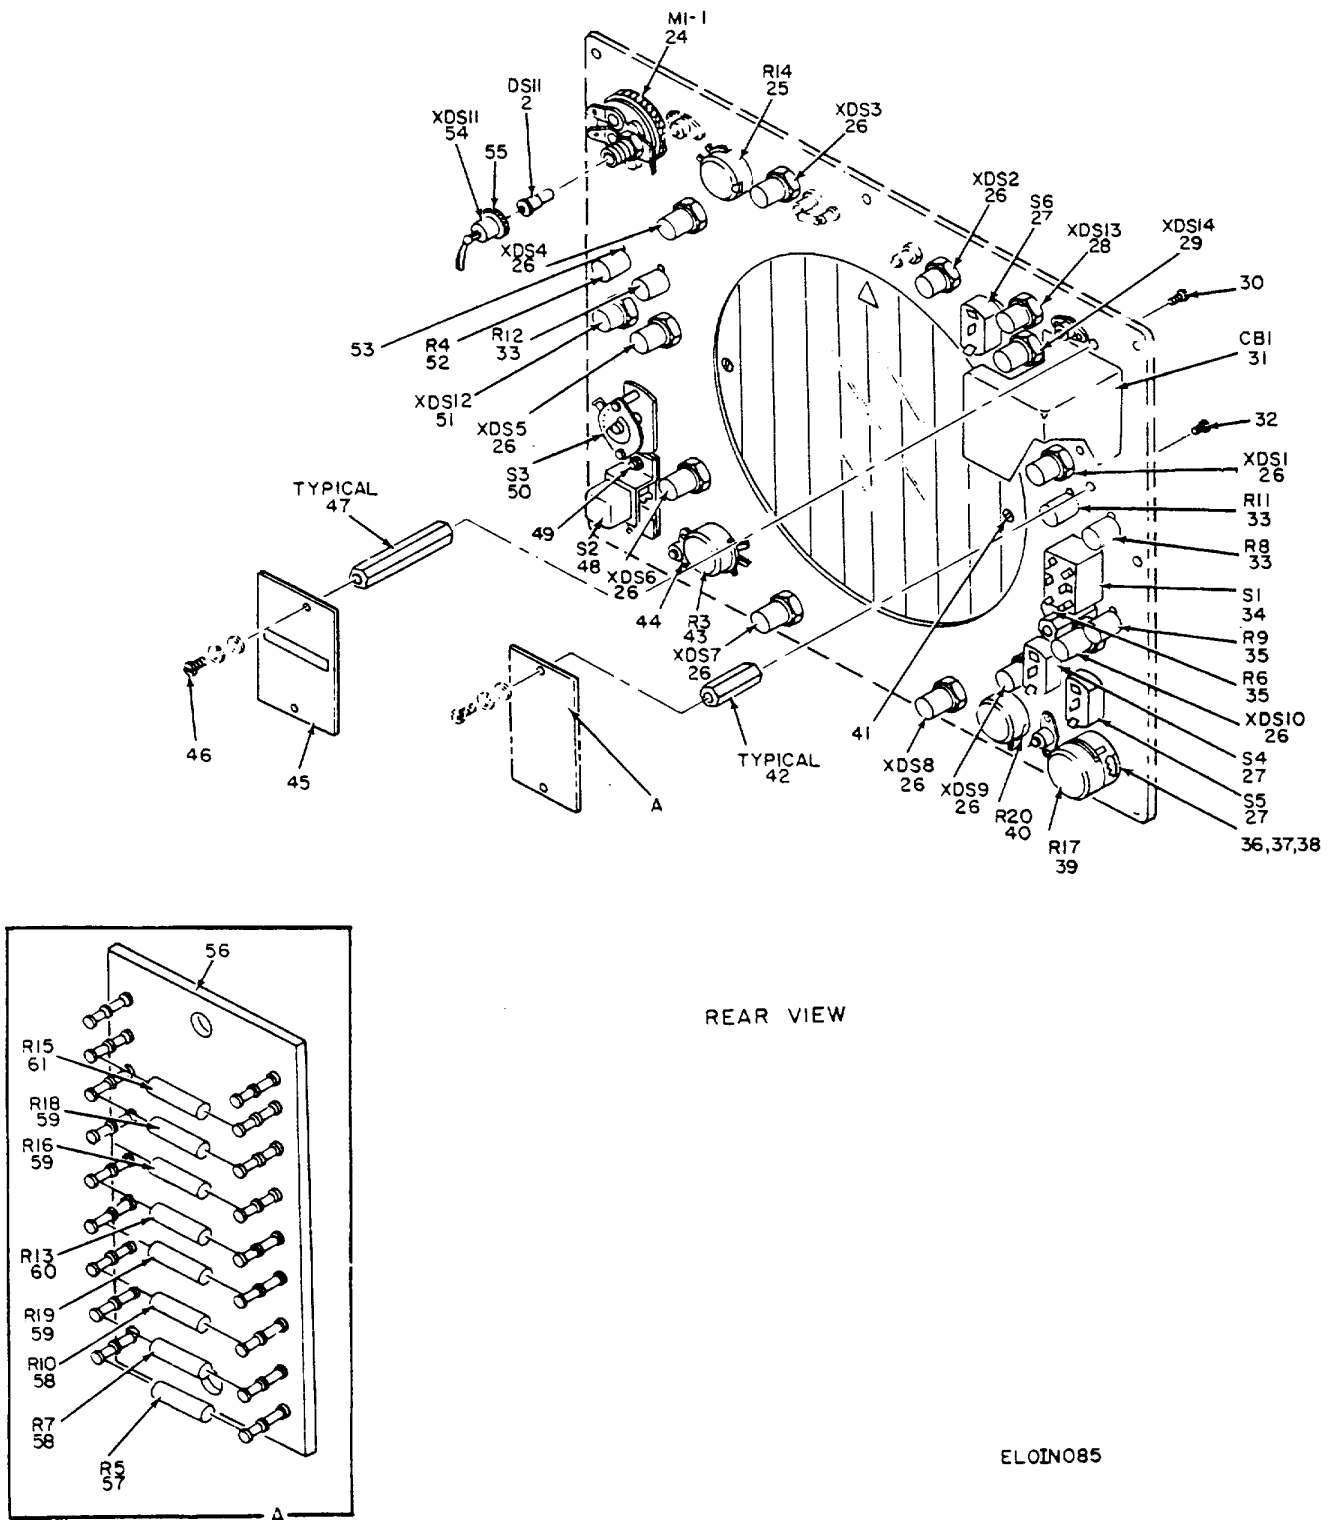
Control Indicator C-6988/TPN-18 Panel Assembly
